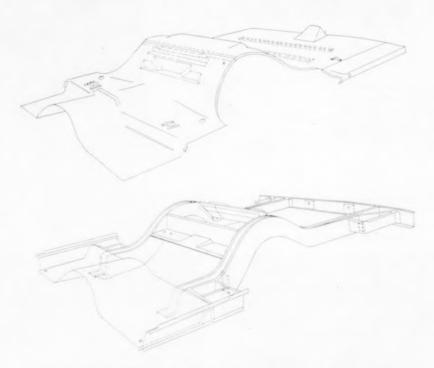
Rear floor pan is built up from two major sections: skin subassembly, top; ladder subassembly, bottom. They meet at point (J) in the main welding line, Fig. 1.
